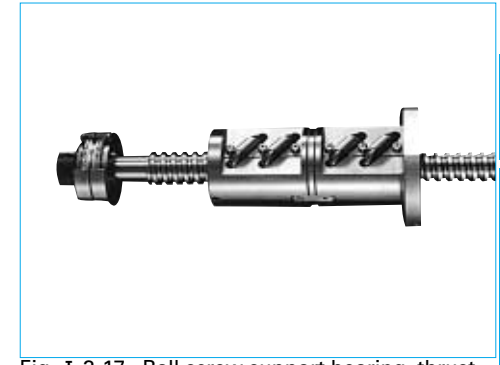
Ball screw support bearing, thrust angular contact ball bearings Page B299
